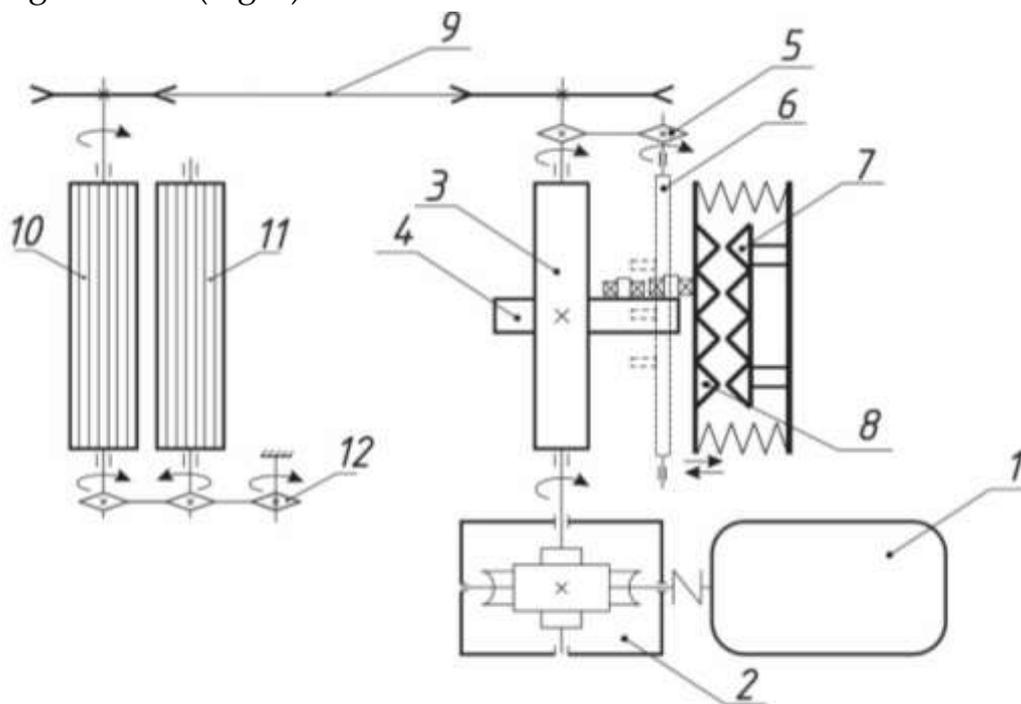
Kinematic diagram of the combined machine: 1 - electric motor; 2 - worm gearbox; 3 - working shaft with cam; 4 - plate (sector); 5 - chain drive; 6 - portioning shaft; 7 - fracturing part (fixed); 8 - reciprocating fracturing striker; 9 - belt drive; 10, 11 - working shafts with grooved cells; 12 - differential chain drive.
